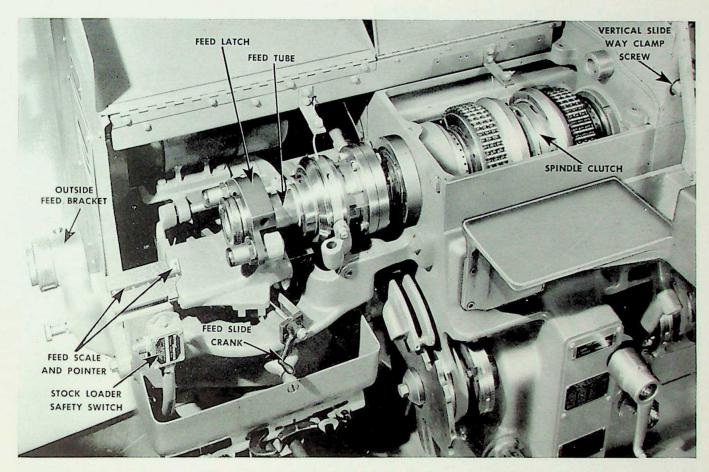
Spindle and Feed Adjusting Mechanism — Guards Raised.
